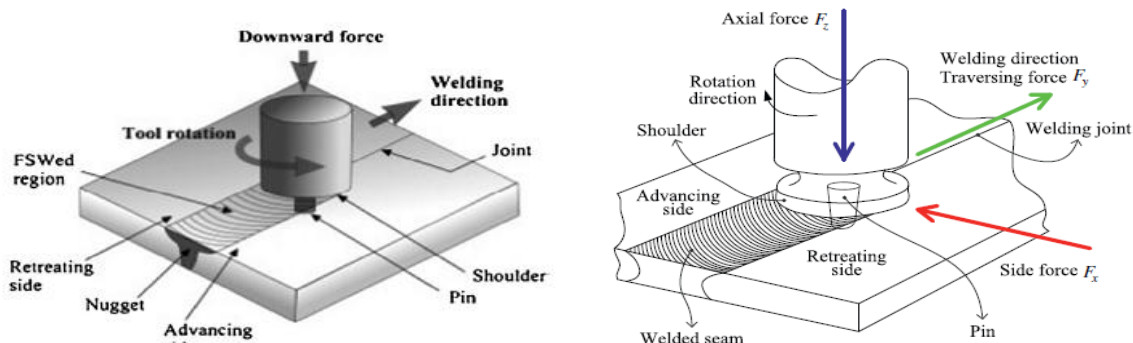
Schematic drawing of FSW process [2] Fig2. Schematic drawing of FSW process [3]
